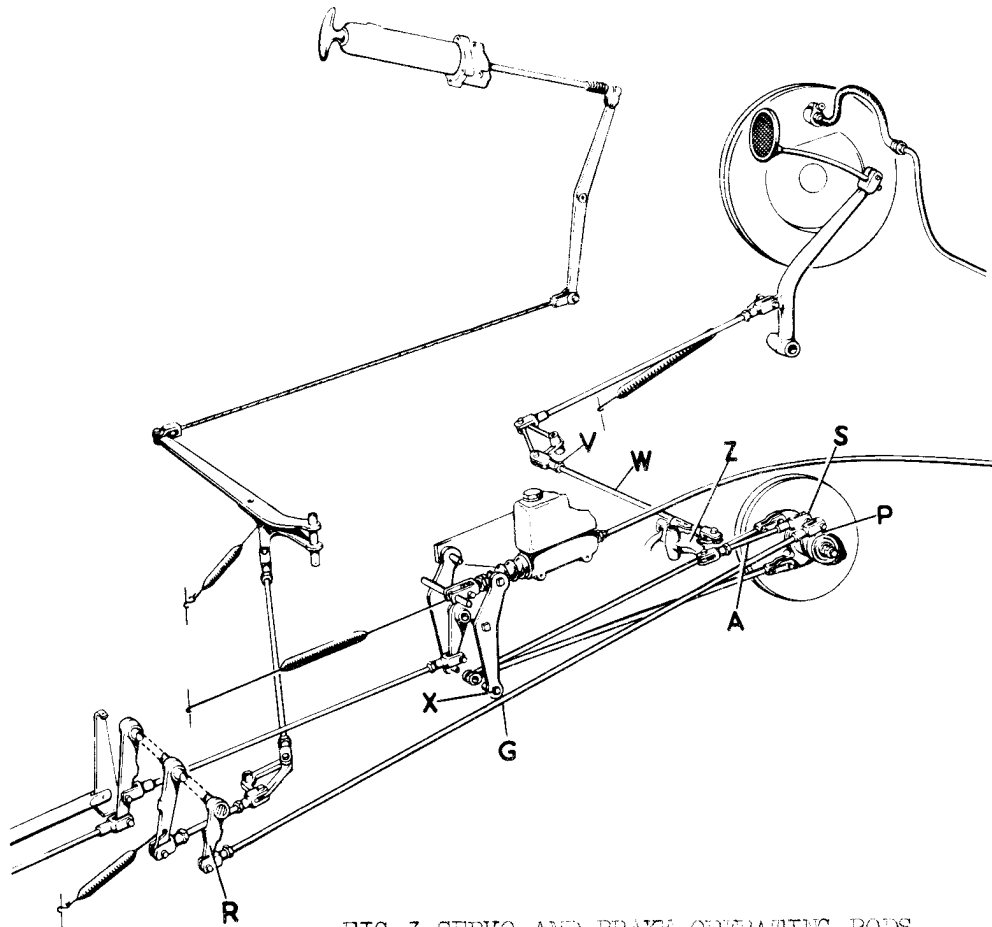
SERVO AND BRAKE OPERATING RODS.
